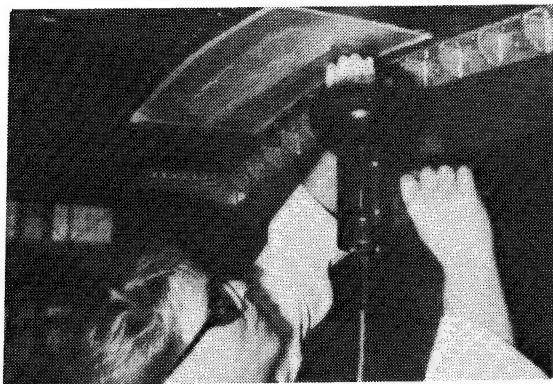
Sun Rez Glass Layup for Splash Mold Tool Fabrication
